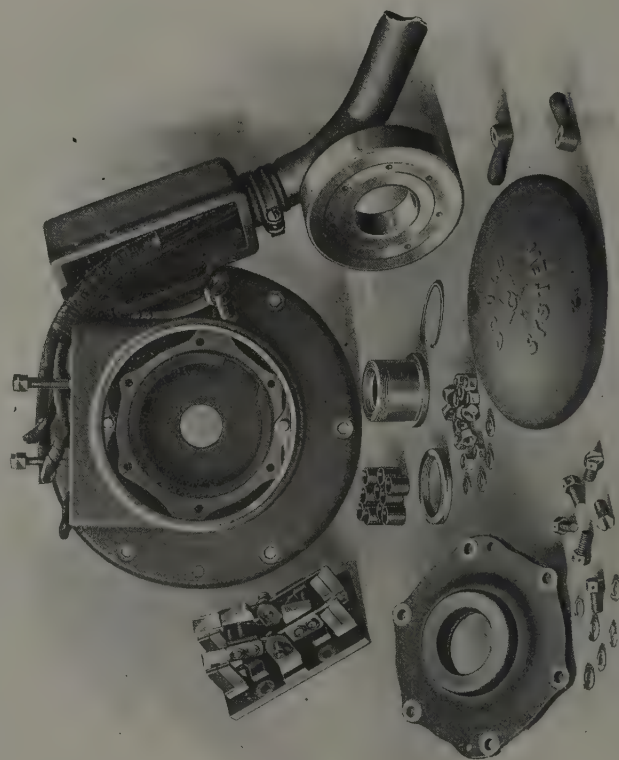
Commutator End Housing Ball Bearing Generator, Pole Changer Switch, Ball Bearing, Bearing Plate and End Cap.
